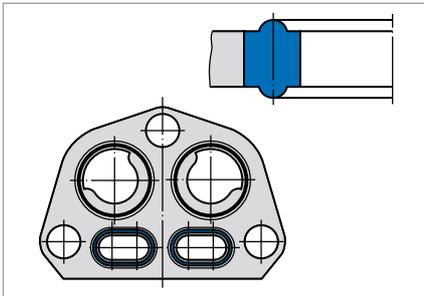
Sealing Plates/Rubberised Sheet Seals
